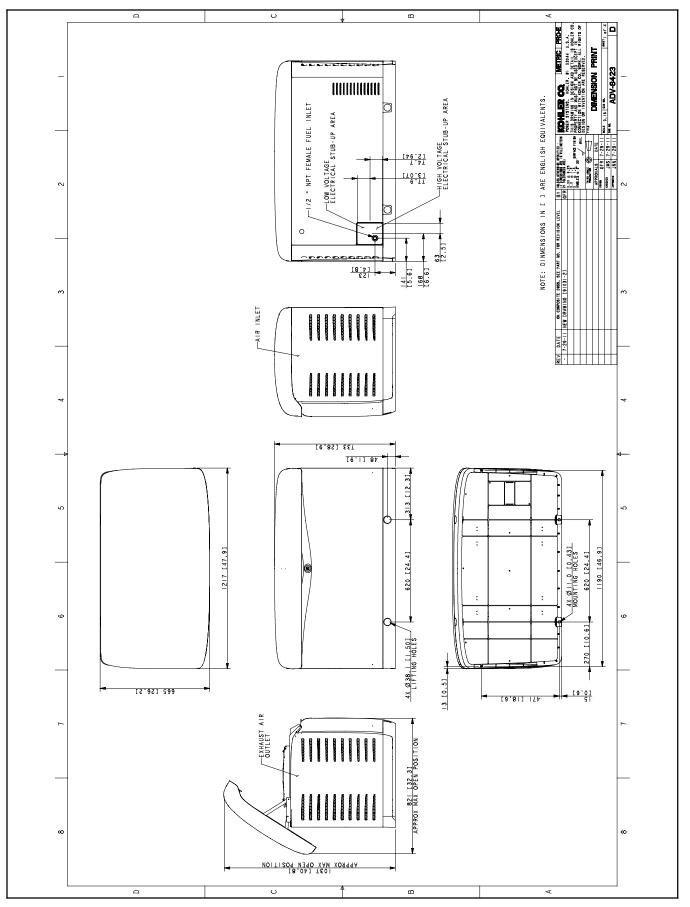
Dimension Drawing ADV-8423, Sheet 1
